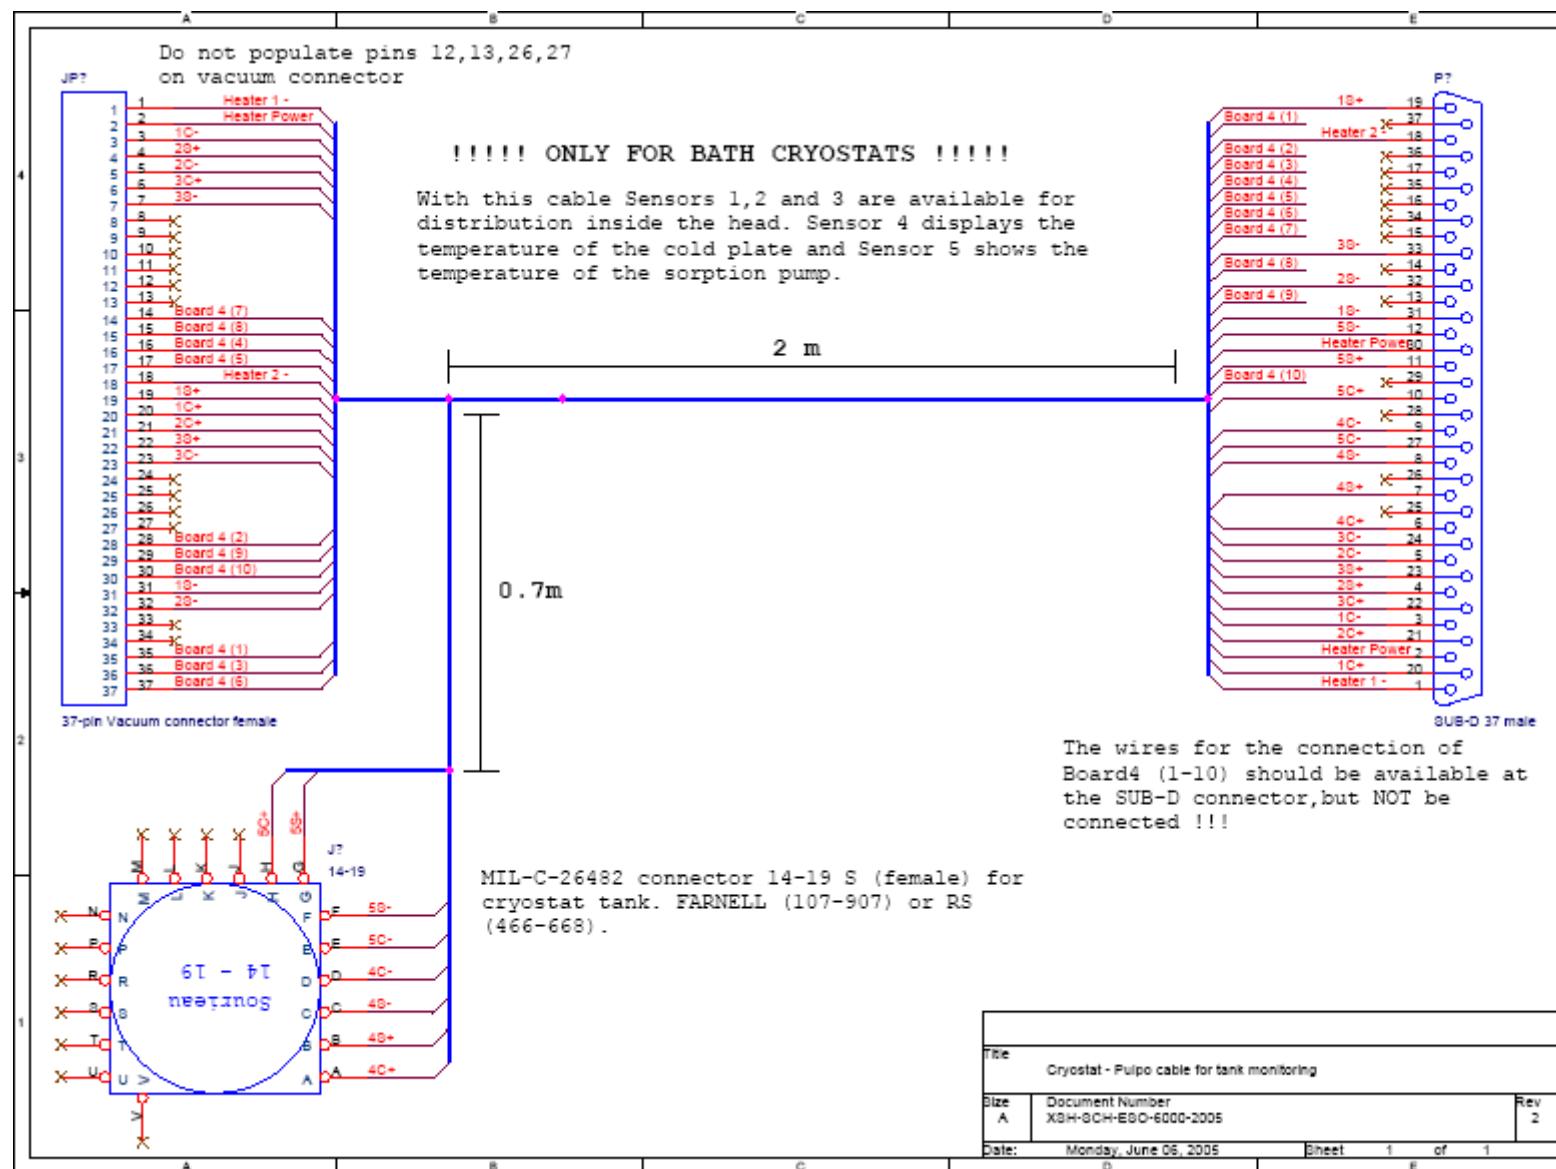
Schematic; Detector Head Thermal Control Cable (W3, W23).
